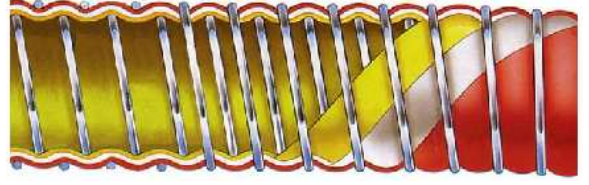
Typical construction design for flexible corrugated pipes. Image taken from [8, pp. 6].
